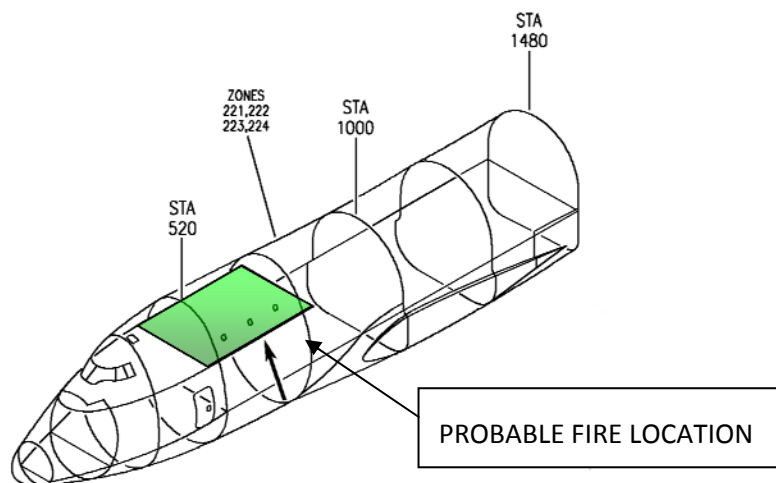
MAIN DECK CEILING PANEL DIAGRAM STATION 400 TO 718.40
